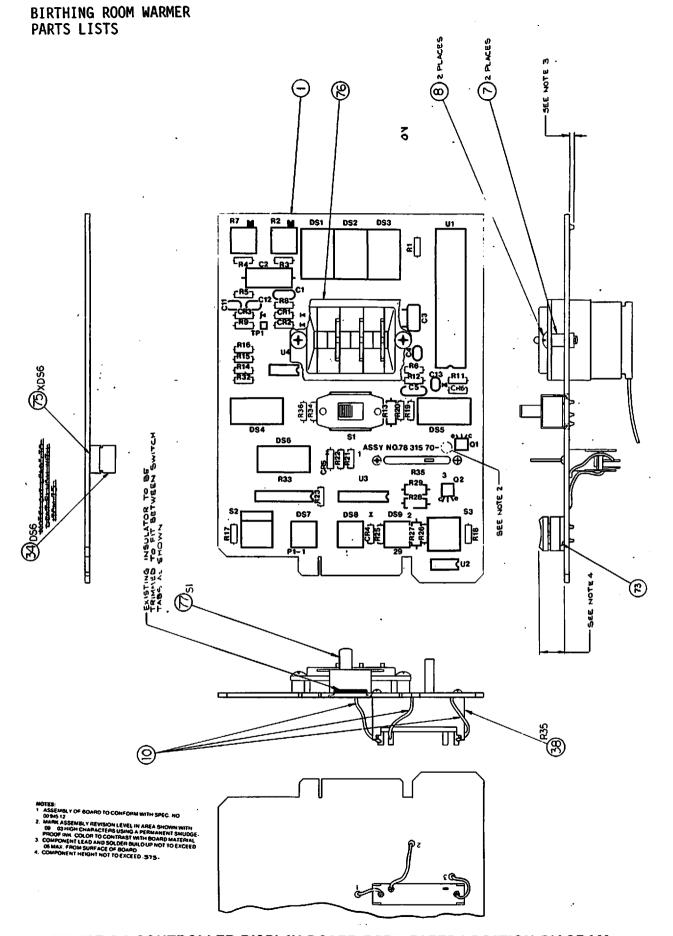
CONTROLLER DISPLAY BOARD PCB1, PARTS LOCATION DIAGRAM
